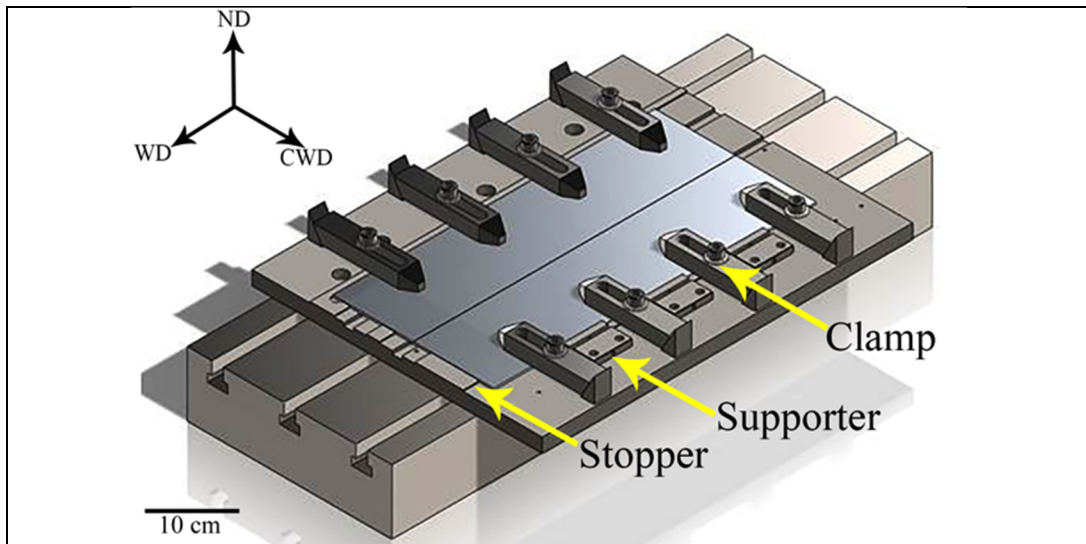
Fixture designed for the repeatability of the FSWed joints. The welding plate is fixed by stoppers, supporters, and clamps in the directions WD, CWD, and ND respectively.
